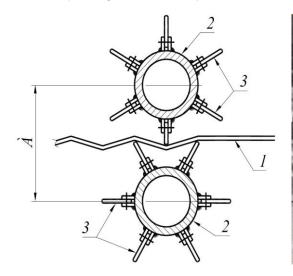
Schematic diagram of steel sheet corrugation on a rotary machine.
